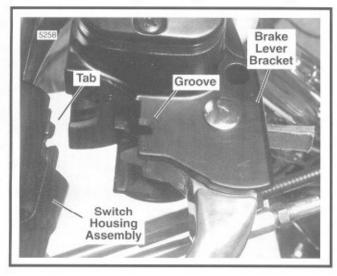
Fit Brake Lever/Master Cylinder to Right Handlebar Switch Housings
